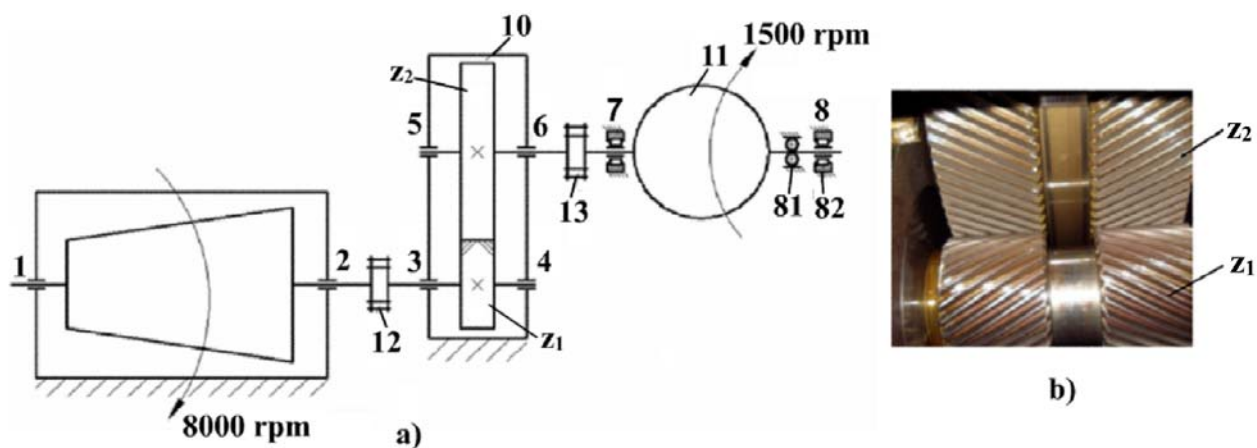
Scheme of the high speed turbounit rotating system (a) and ordinary double-helical gear train;  $z_1$  - driving gear,  $z_2$  - driven gear (b)
